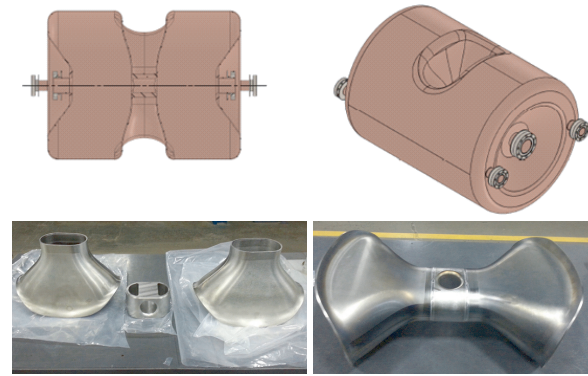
Single-spoke cavity with cleaning ports (top), spoke parts (bottom left), and welded spoke (bottom right).
